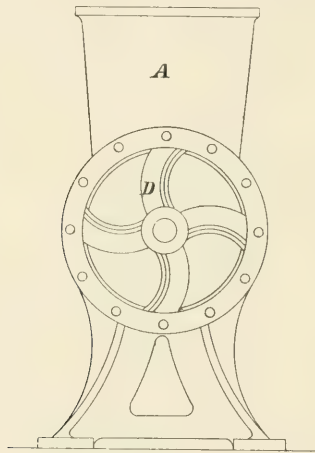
Hall-Bainbridge Peat Machine—Vertical Cross-section.
